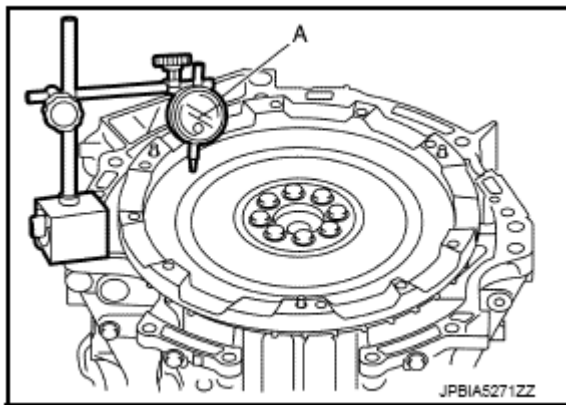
Measuring Deflection Of Flywheel Contact Surface To Clutch Using Dial Indicator
